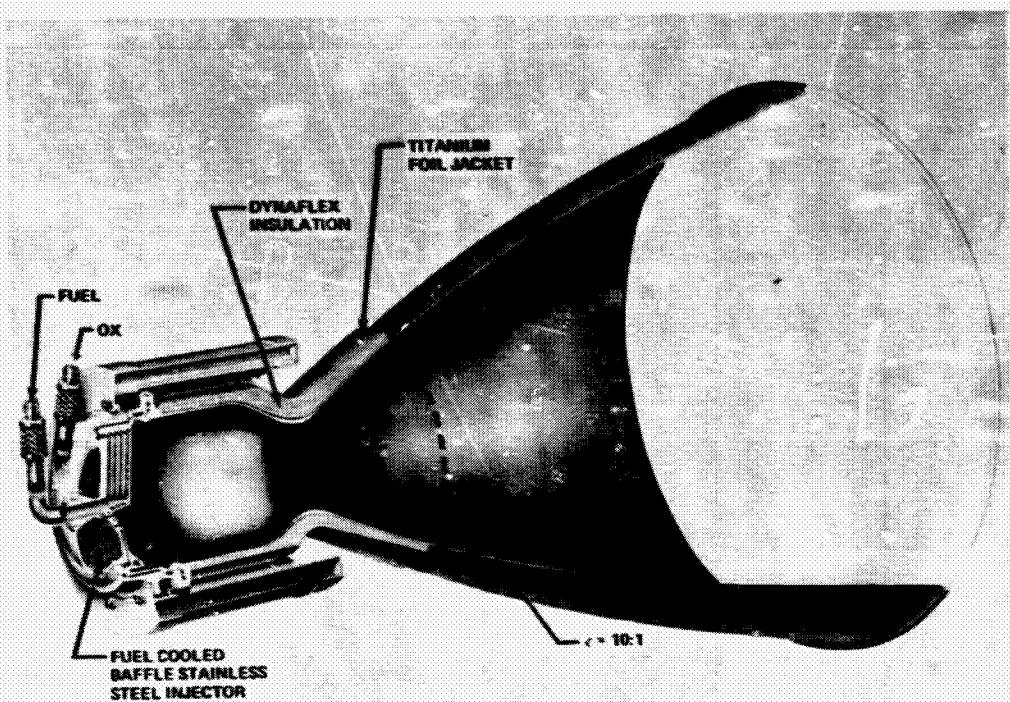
INSULATED COLUMBIUM THRUST CHAMBER ASSEMBLY
